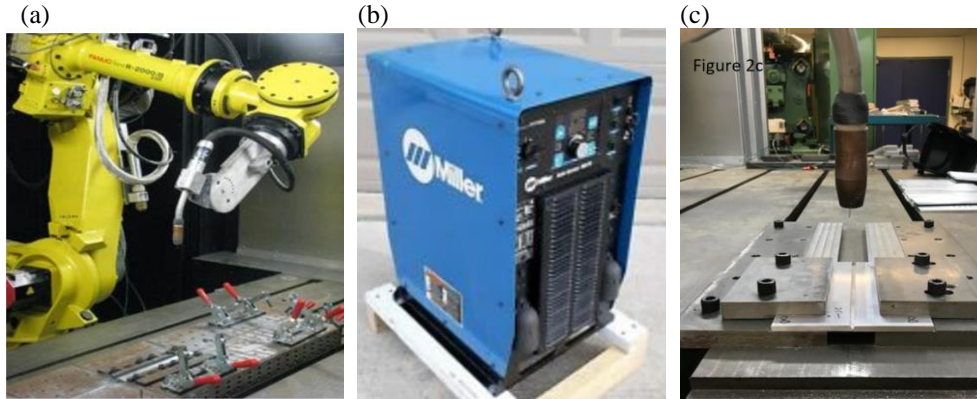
(a) Robot Fanuc R2000 (b) Miller Auto Axces 750 (c) Current welding process
